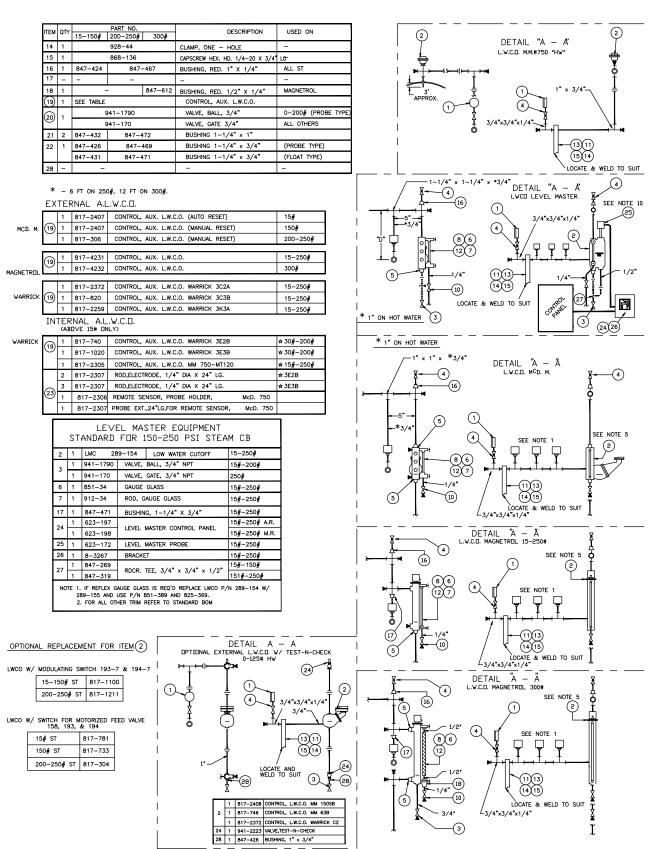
Water Column Piping 100-200HP (55" & 60")
